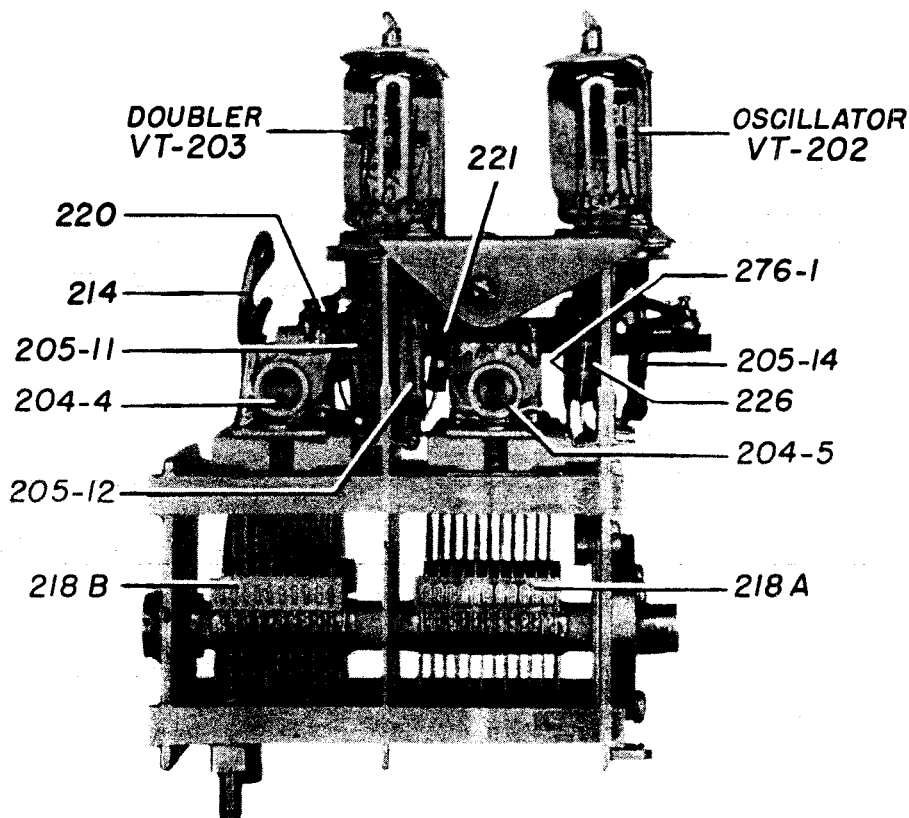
Radio Receiver BC-639-A, Left Side View, Oscillator Assembly
